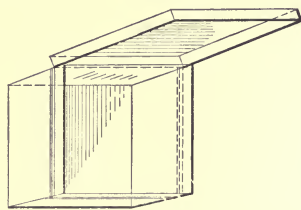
HOT-GALVANIZED STEEL CABINET.
